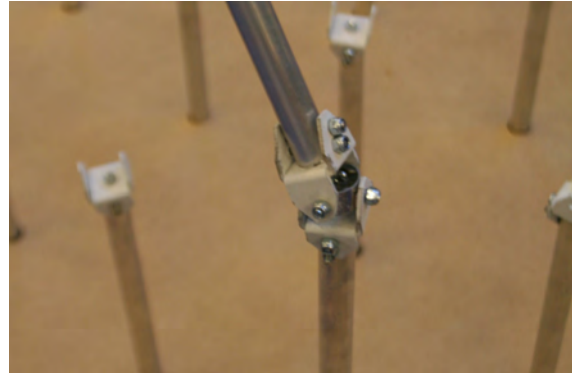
First finished universal joint. The ring came from an old tent pole.
